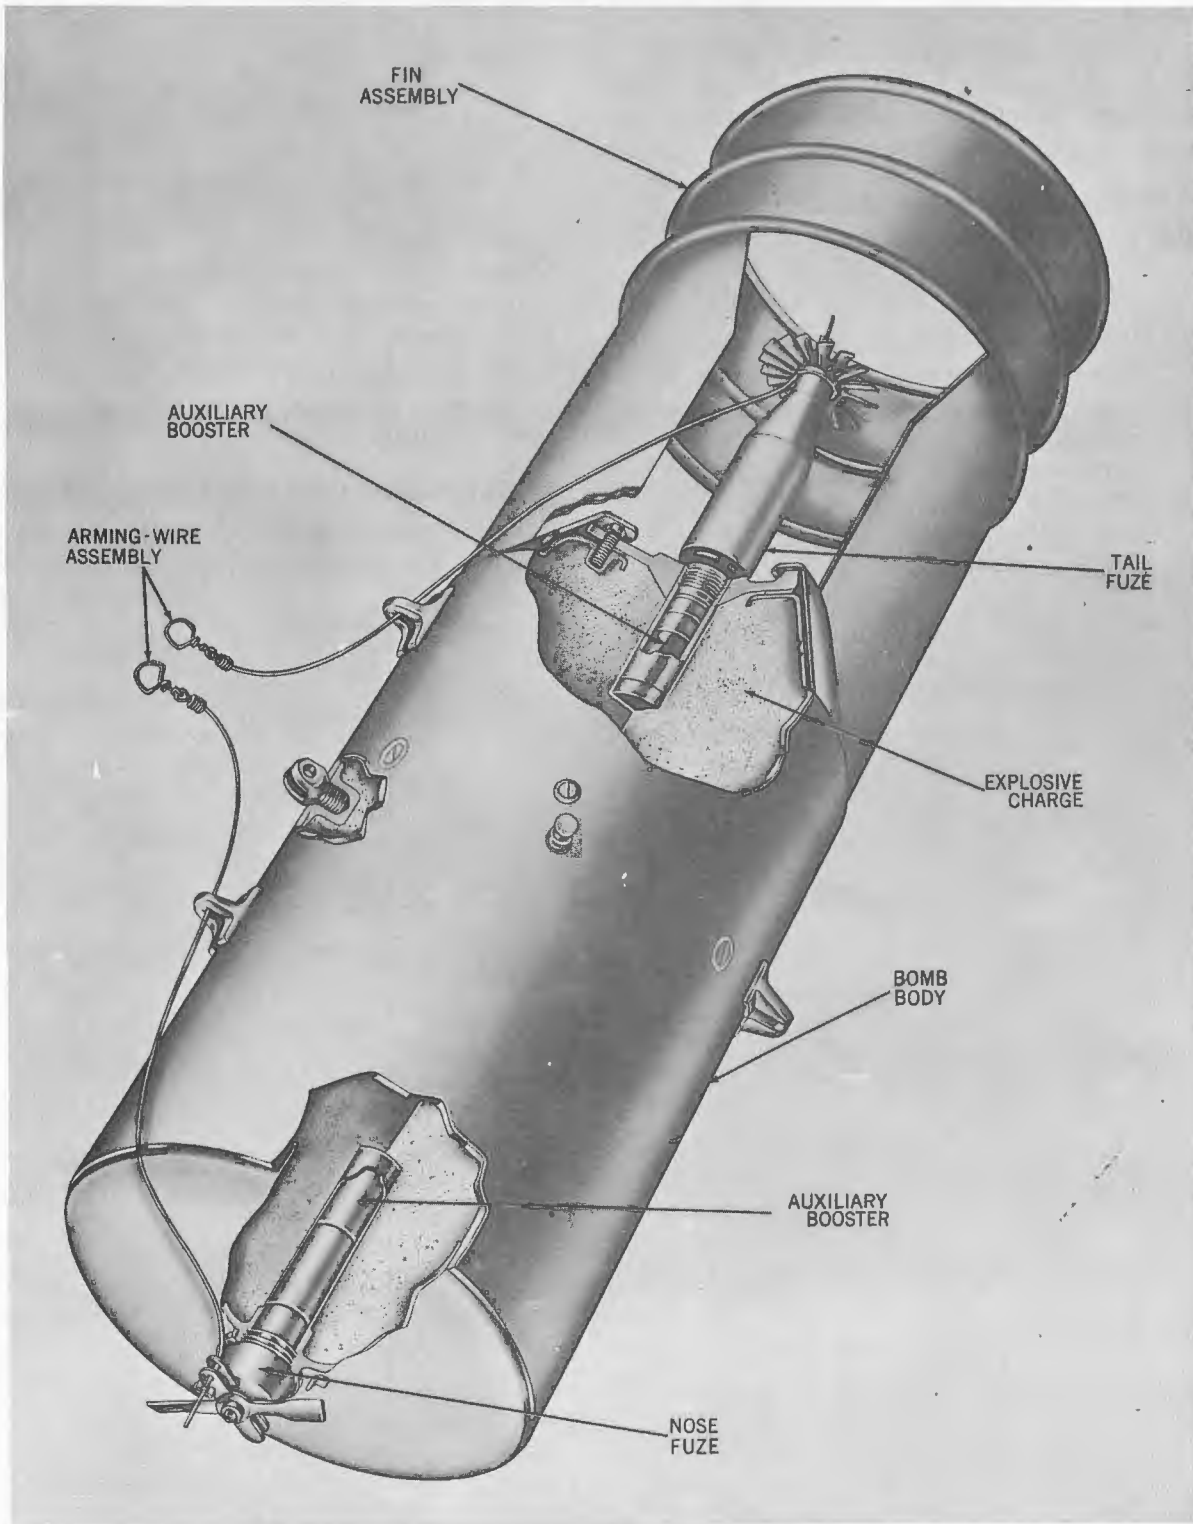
350-lb Aircraft Depth Bomb AN-Mk 54 Mod 1, Cutaway View.
